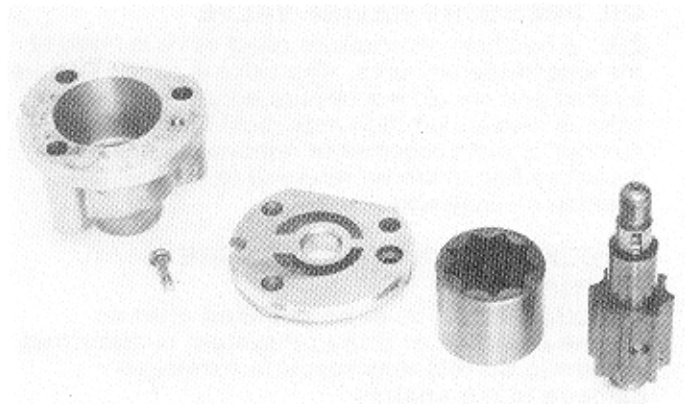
Dismantled Rotary Oil Pump Two-Cylinder Engines
